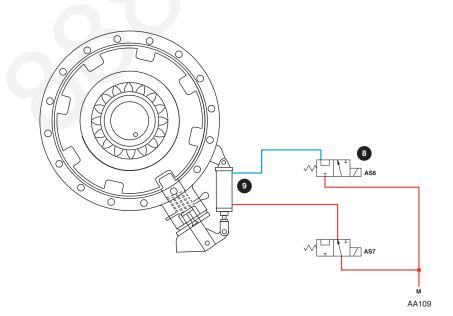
SWING LOCK AIR SYSTEM (Swing Lock Engaged)
